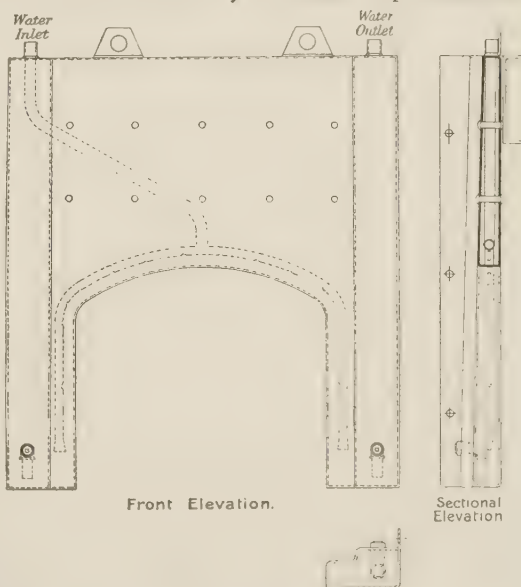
Knox Pressed Steel Water-cooled Door Frame.
